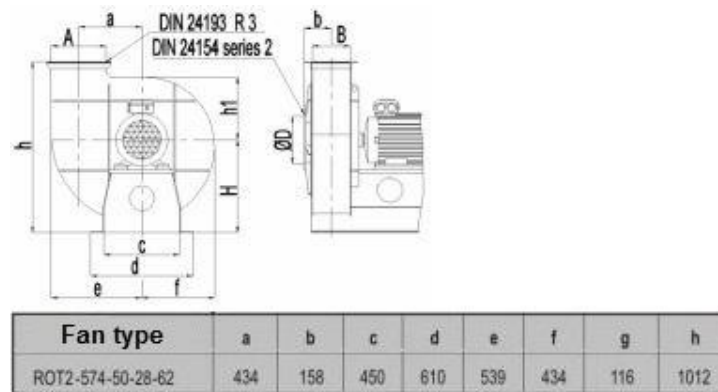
Dimensions of the fan ROT2-574-50-28-62 [20]
